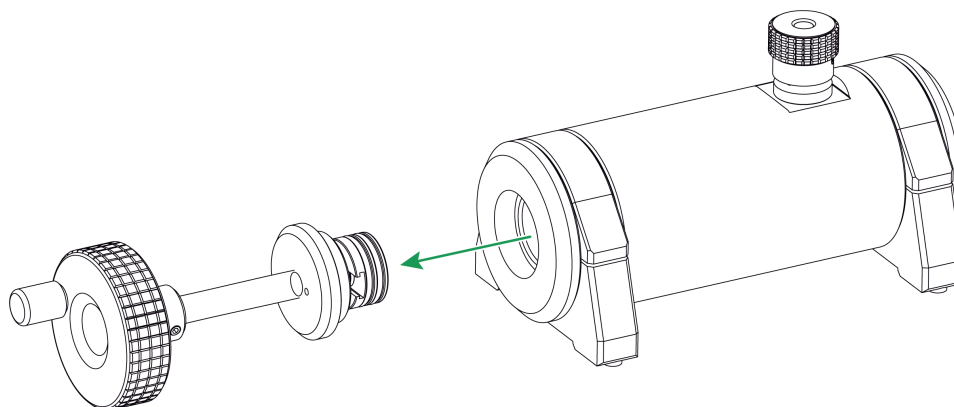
Disassembly of the Coarse Adjust Handwheel
